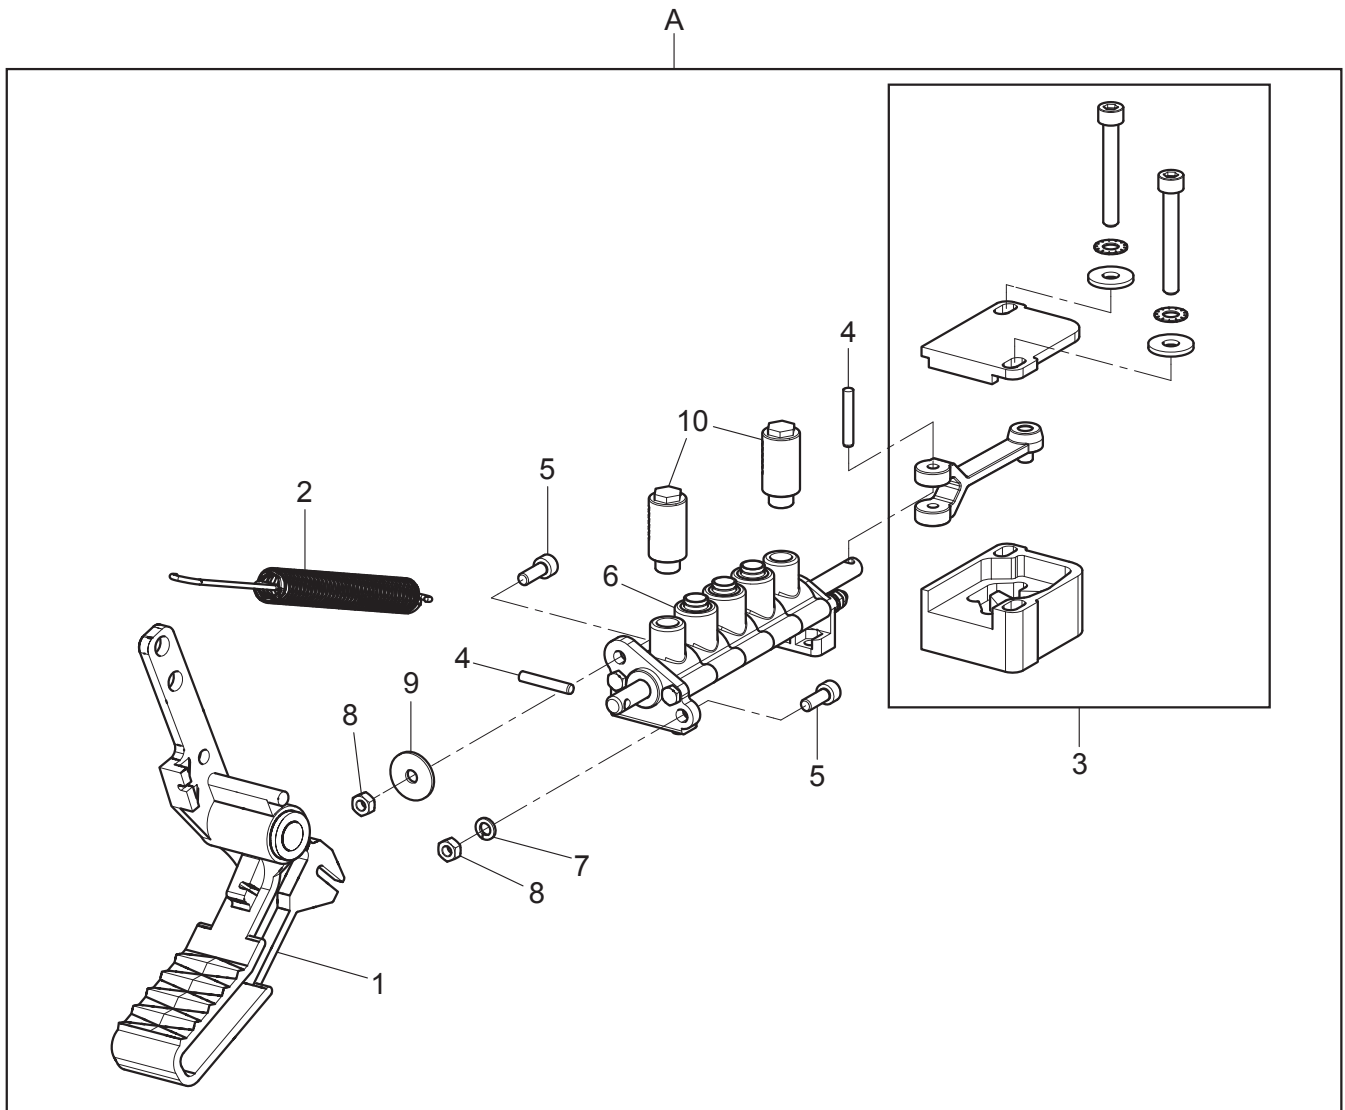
Rev. 3			VSG800A102			→	→	→
